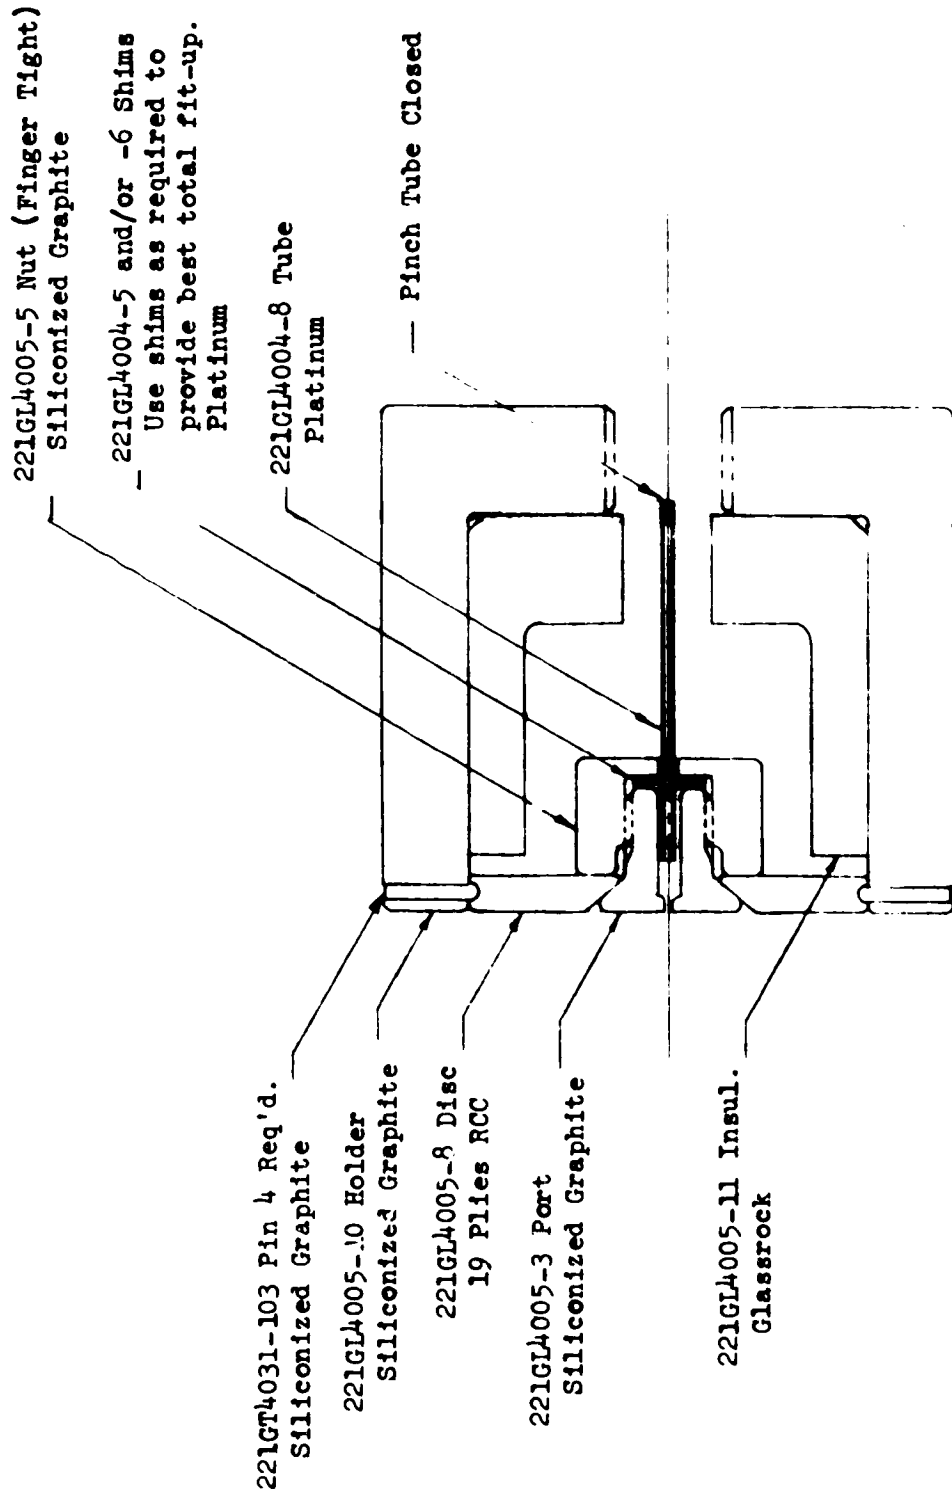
CONCEPT 1A ASSEMBLY
